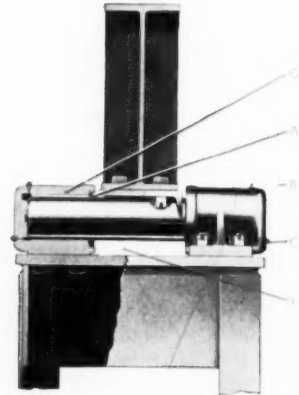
Bearing and lubrication details for "OILWELL" pumping unit.
